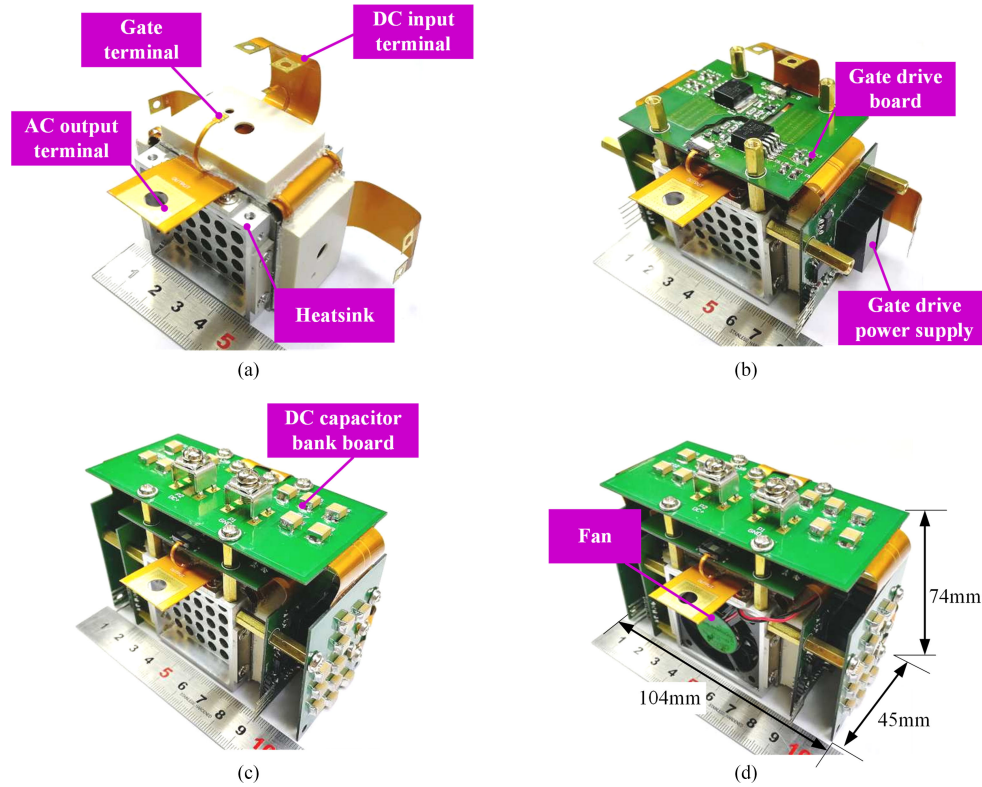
Air-cooled integrated 1200-V/120-A full SiC power module. (a) Heatsink integration. (b) Gate drive board integration. (c) DC-link board integration. (d) Air-cooled fan integration.
